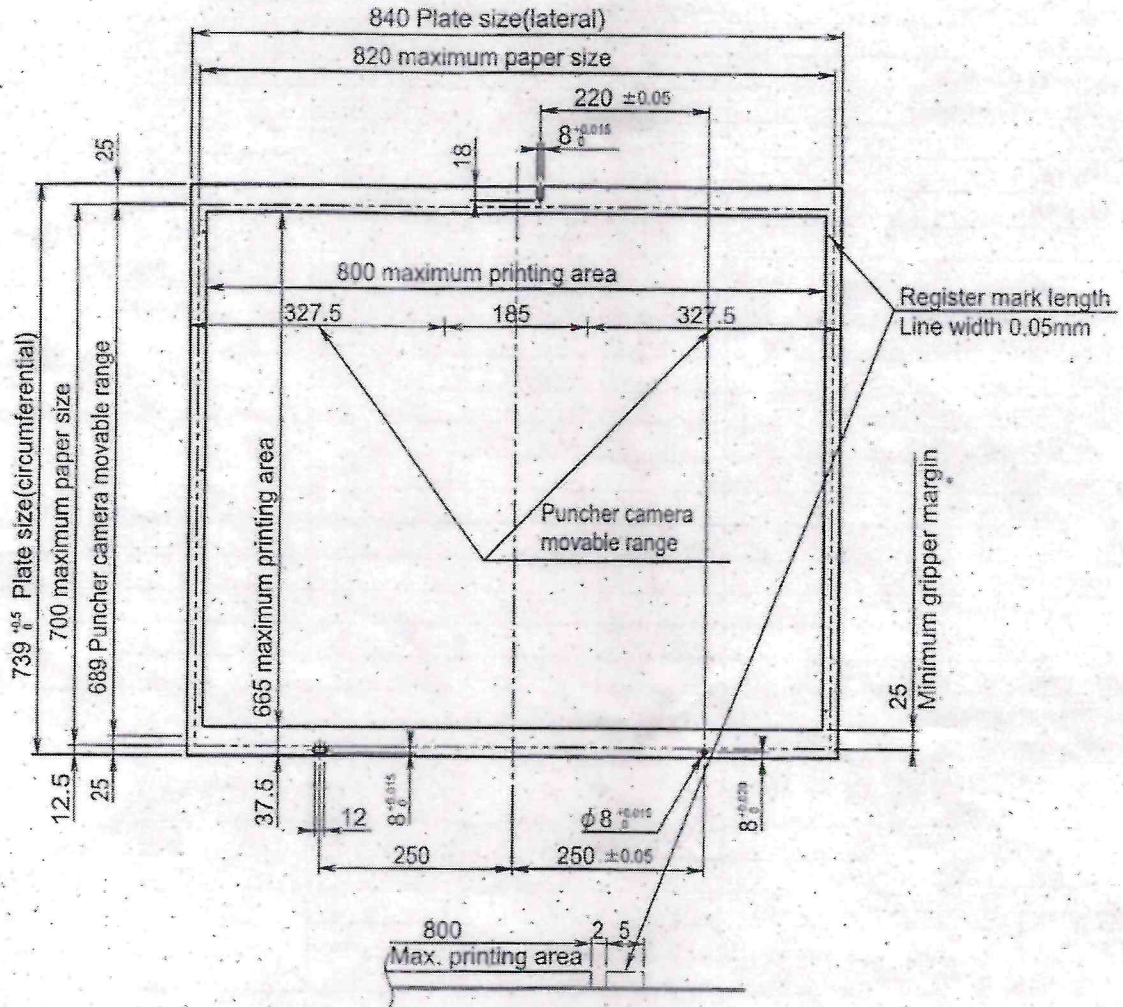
PLATE PUNCHING LAYOUT DRAWING - SIMULTAN for ISP Plate Size - 777 X 840 mm
